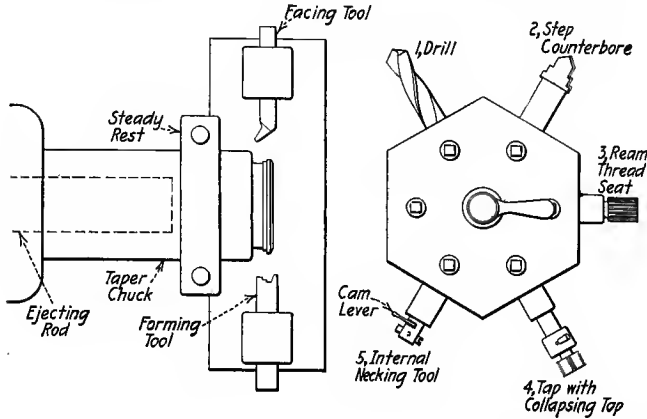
TURRET LATHE SET-UP FOR FINISHING BASE AND PRIMER HOLE
